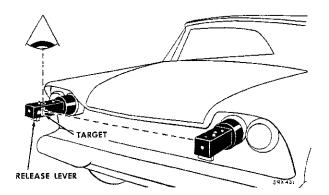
Mounting and Adjusting the Aimers (Typical)
